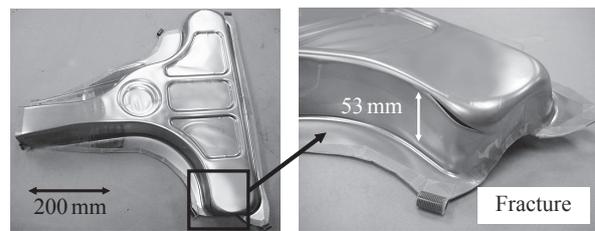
Formable height without fracture in actual press forming of the model center pillar
